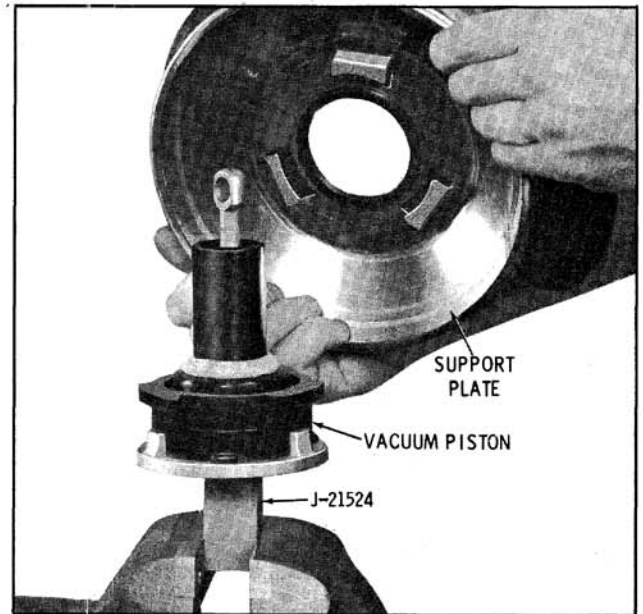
Positioning Support Plate on Vacuum Piston
